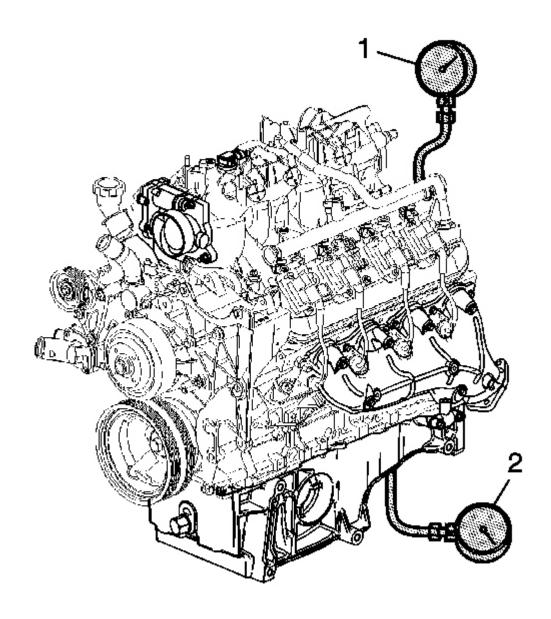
Installing J 21867 To J-21867-16 Courtesy of GENERAL MOTORS CORP.
